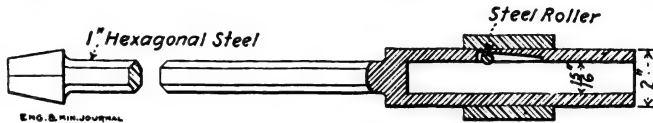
APPARATUS TO DRAW STUCK BARS.
